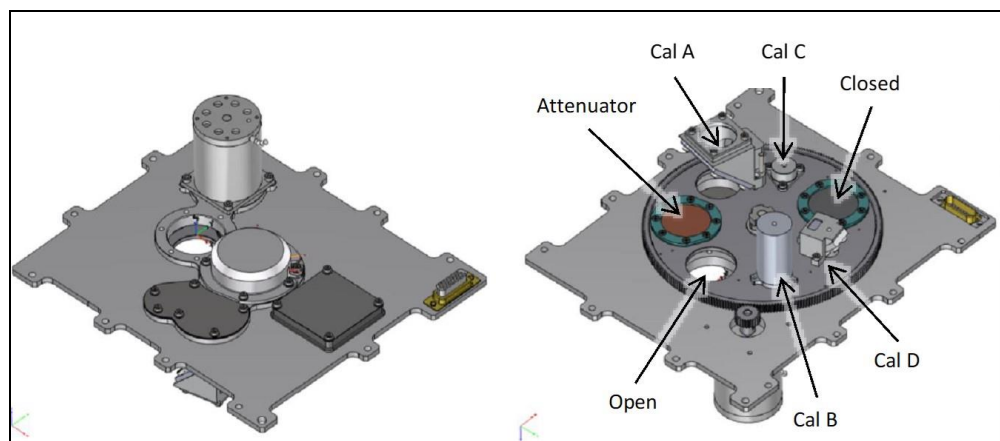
Filter and calibration wheel assembly (left: top view (+z); right: bottom view (-z))
